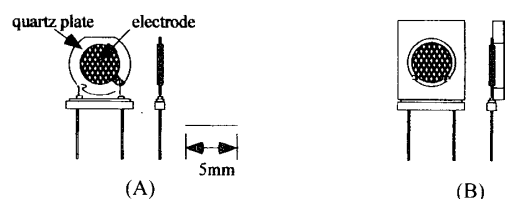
(A) Quartz oscillator assembly (front and side views), (B) One side covering of quartz oscillator assembly
